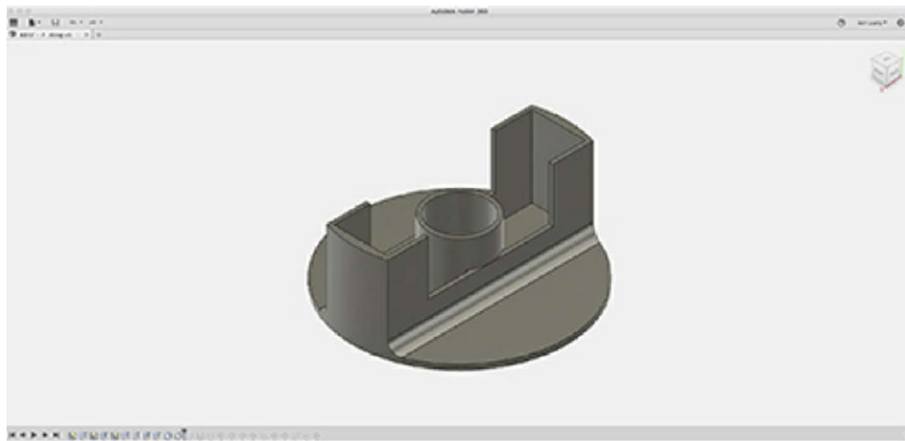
A 3D CAD model of a shaft end cap produced in Autodesk Fusion 360 ¹³²
